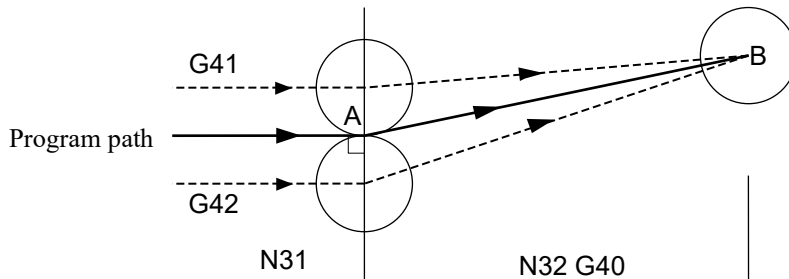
Cancel of Tool-tip Radius Compensation - 1
